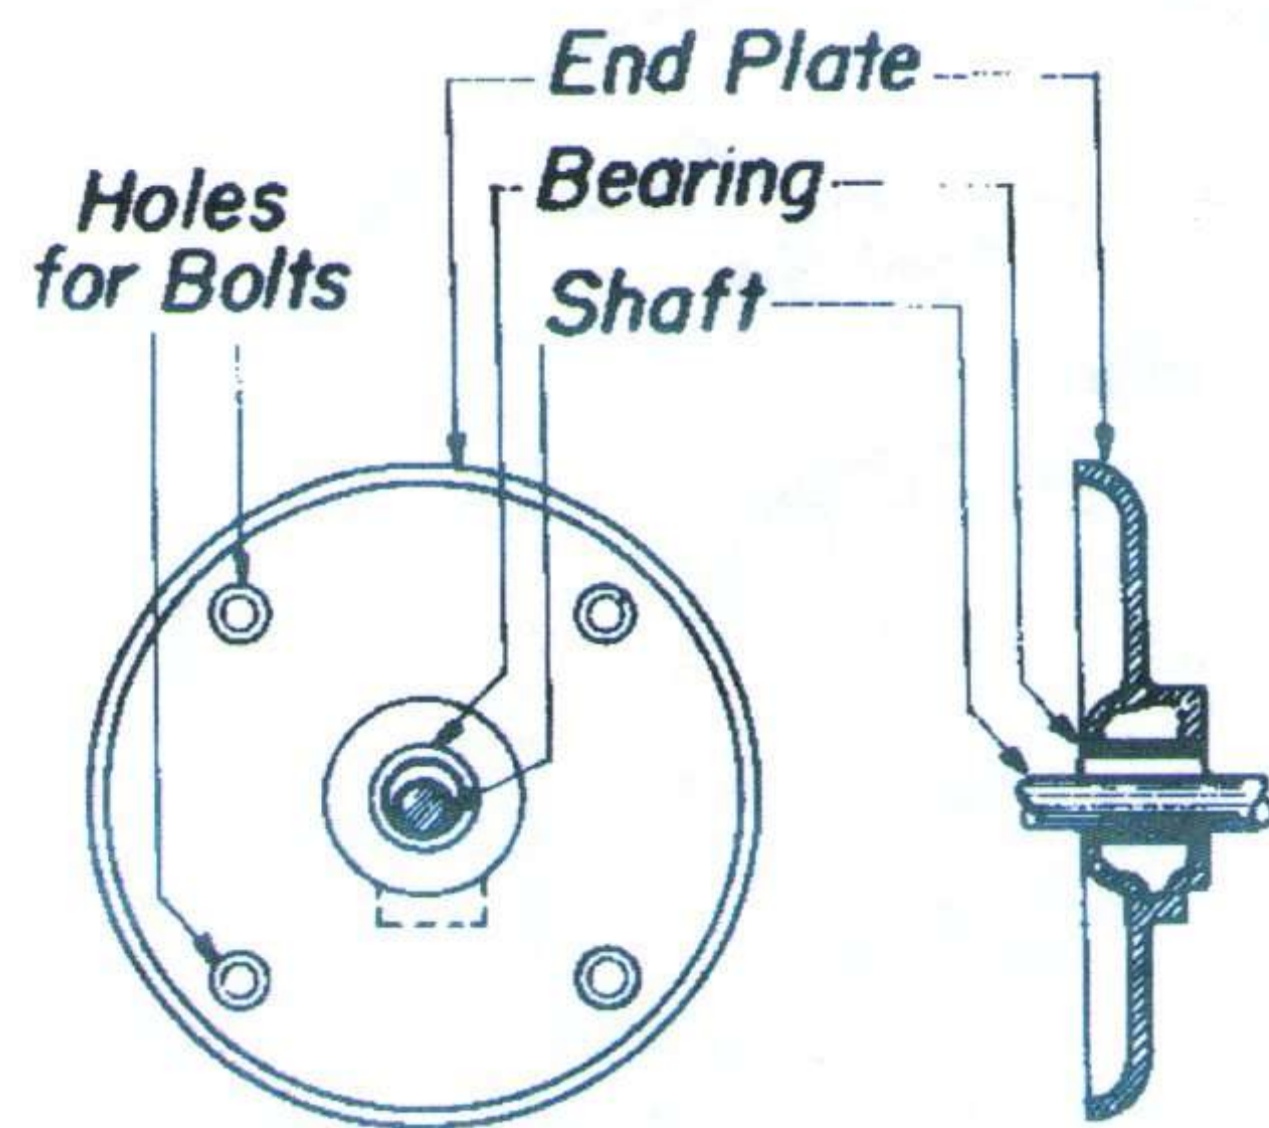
If the shaft can be moved vertically, it indicates a worn bearing or worn rotor shaft.
